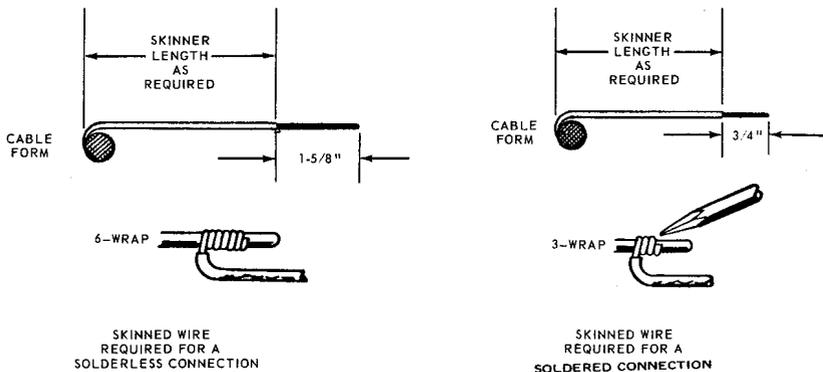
Skinned Lengths Required for Solderless and Soldered Wire Wraps.
